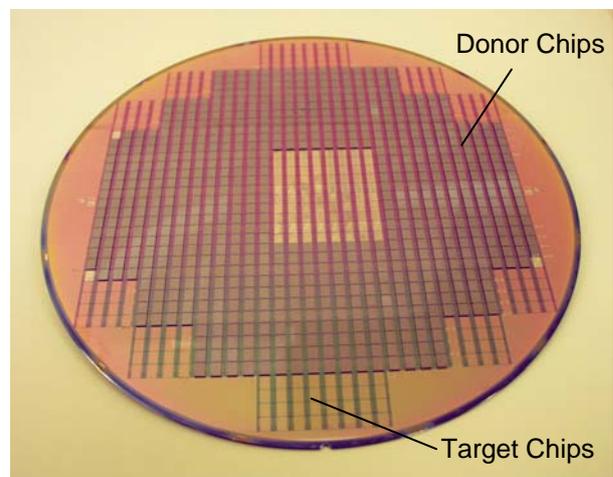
Wafer level chip scale processing; 100% yield transfer of chips after soldering and removal of handling substrate
